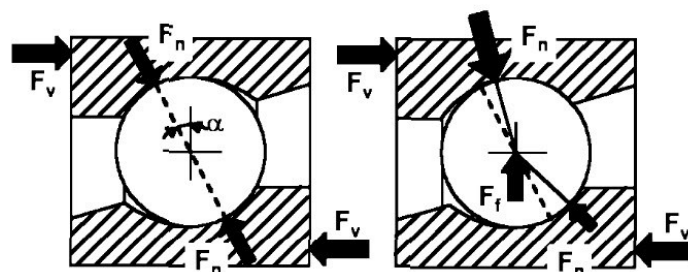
Bearing contact forces distribution change due to centrifugal forces (Abele and Fiedler, 2004).
